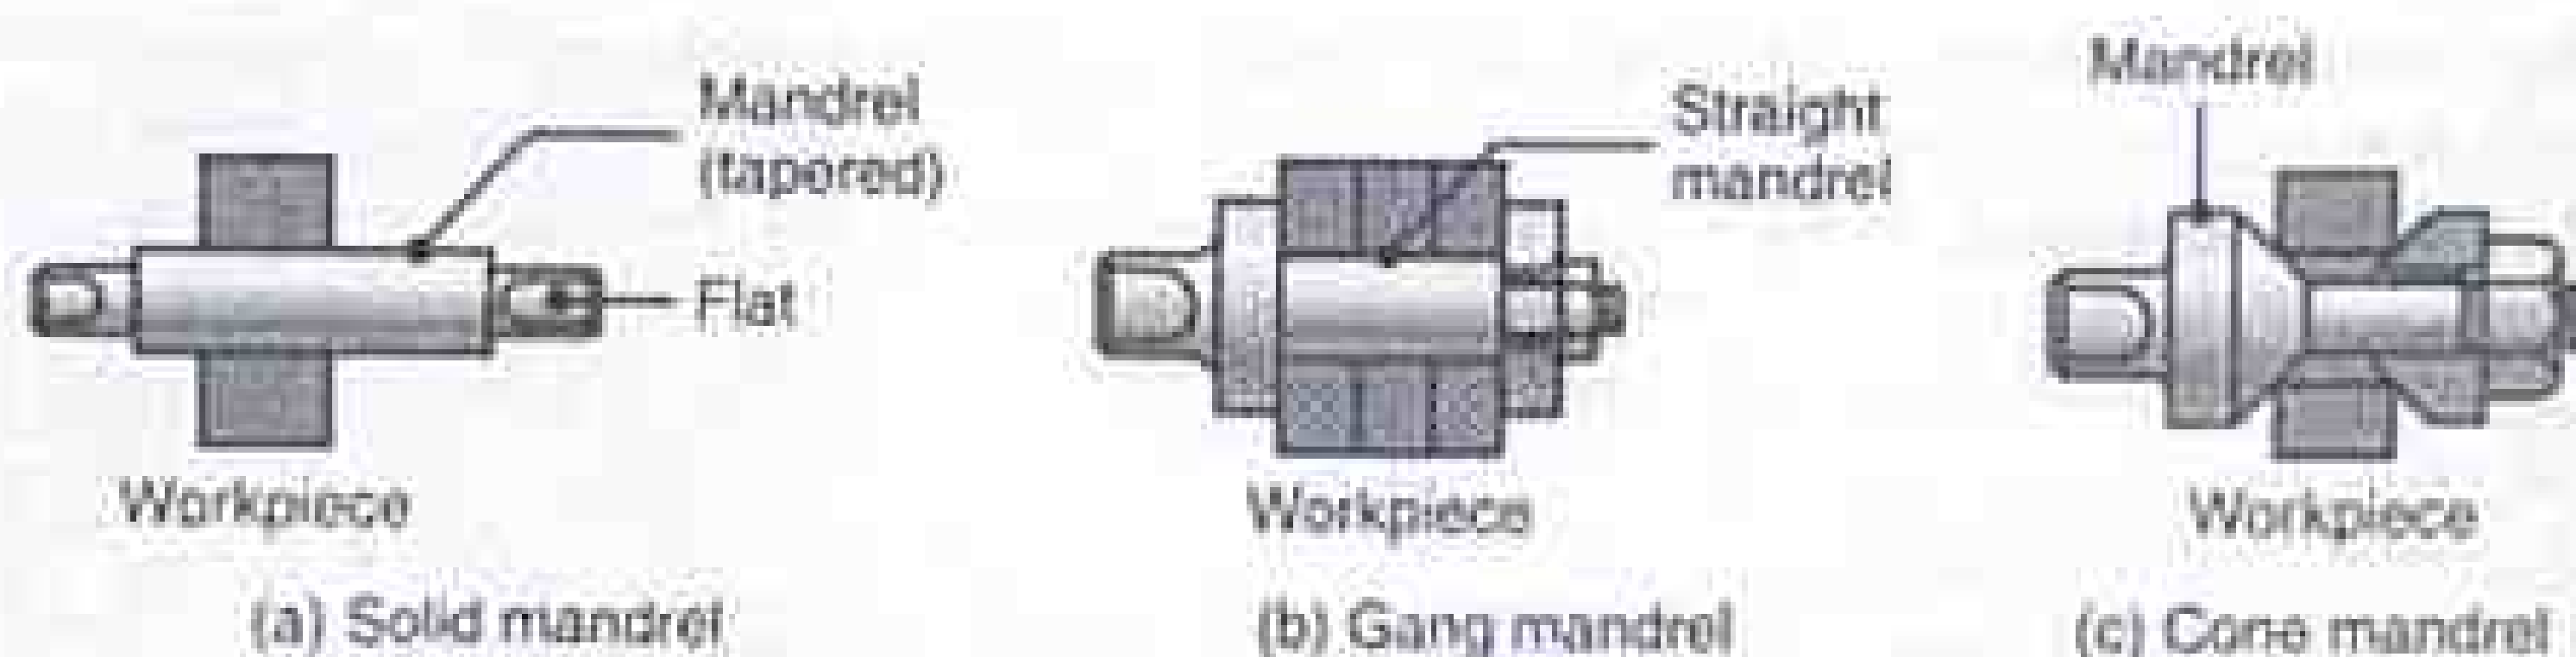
Various types of mandrels to hold workpieces for turning; these mandrels usually are mounted between centers on a lathe. Note that in (a) both the cylindrical and the end faces of the workpiece can be machined, whereas in (b) and (c) only the cylindrical surfaces can be machined.
